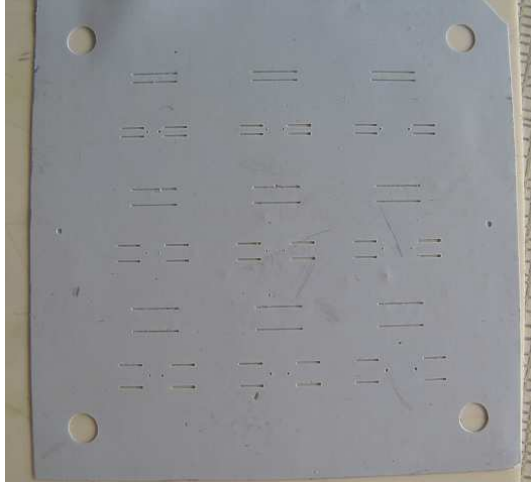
Prototype 1. The sixth layer after cutting the grooves with the micromachining laser. The tape size is 50.8×50.8 mm². The four circular holes in the corners are for alignment on the stacking fixture, and the two smaller holes at half the substrate height are used for alignment during screen printing.
